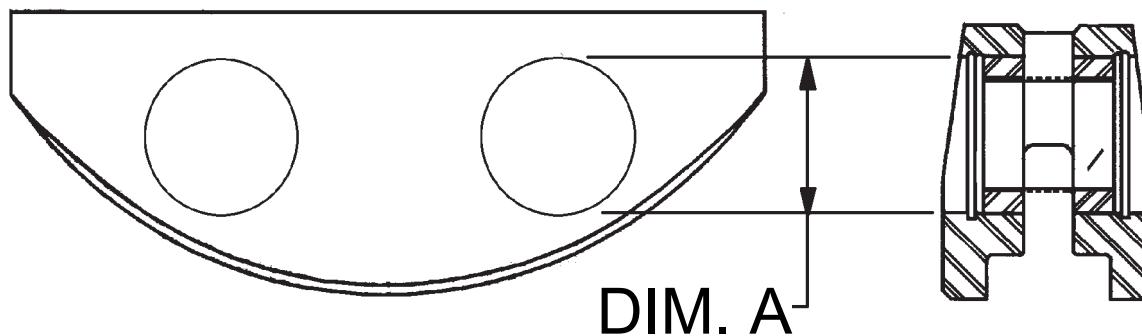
Crankshaft Counterweight Bushing Dimensions
